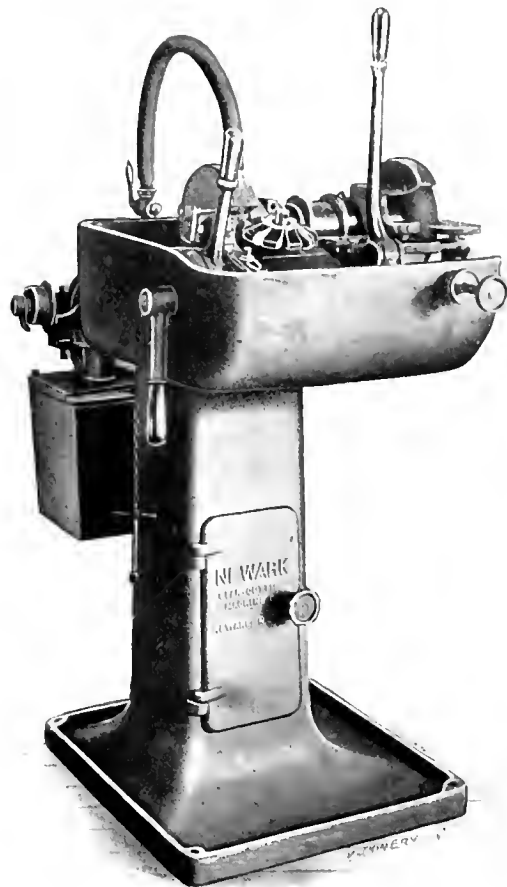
Special Water-cooled Grinder for Sharpening Formed Gear Cutters
